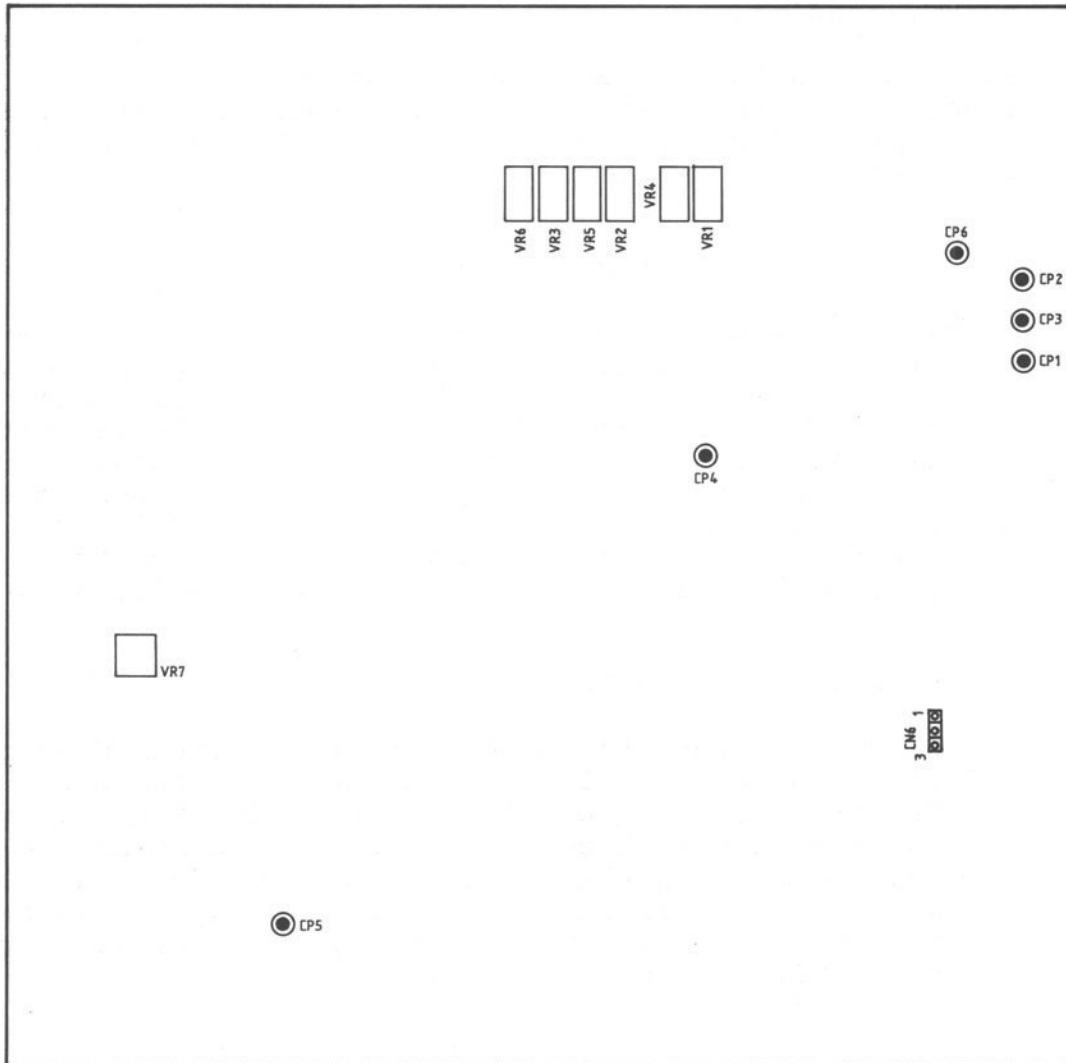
Location of Trimmers and Test Points on Capstan Control PCB
